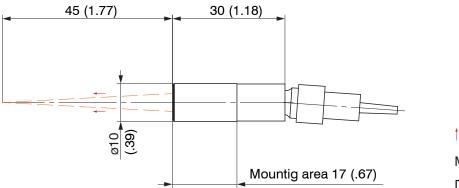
Dimensional drawing of IMP-TH45 thickness sensor
